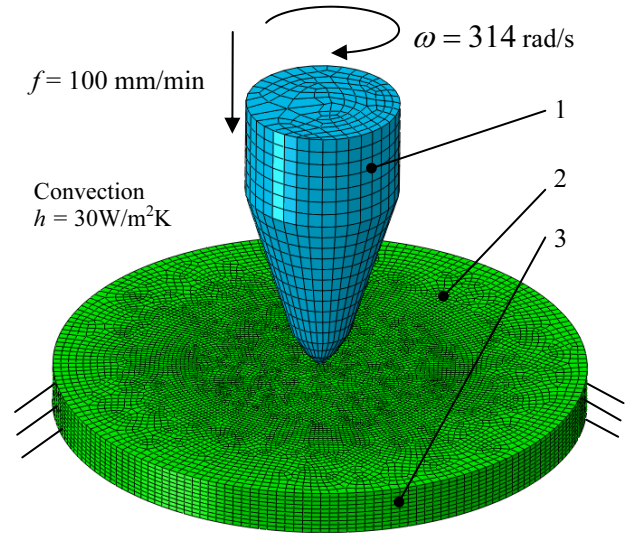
Mesh and boundary conditions: 1 – the drilling tool; 2 – the workpiece; 3 – the fixed surface of the workpiece
